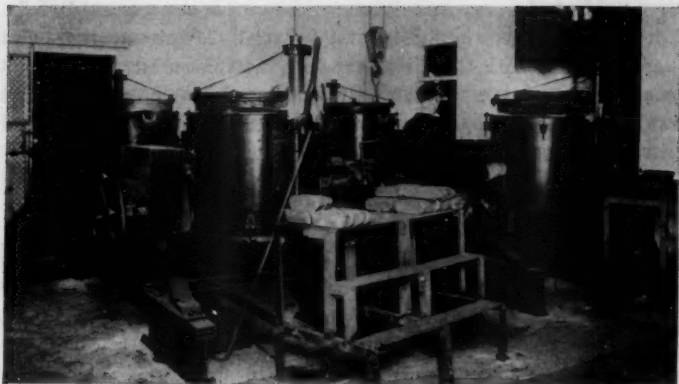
BATTERY OF FOUR TILTING FURNACES, OIL FUEL, SIZE NO. 225 LONG LIP CRUCIBLE, MELTING HIGH GRADE BRONZE FOR SLEEVES AND OTHER PARTS FOR HEAVY MACHINERY. CASTINGS WEIGHT 800 TO 2250 POUNDS. (ILLUSTRATION, COURTESY NORDBERG MANUFACTURING Co.)
